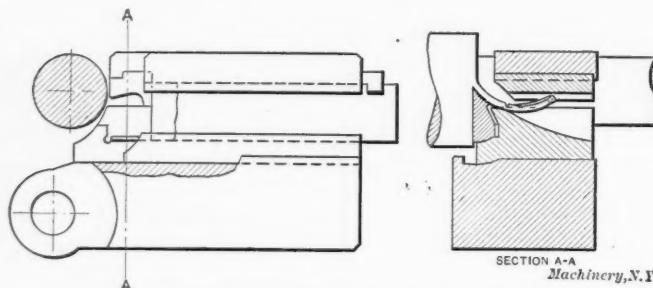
Chip Breaker used in the Flat Turret Lathe.
